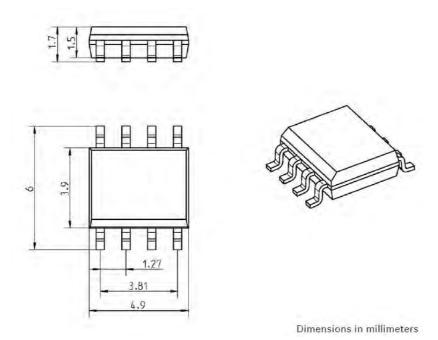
Package dimensions 8-pin narrow SOIC housing
